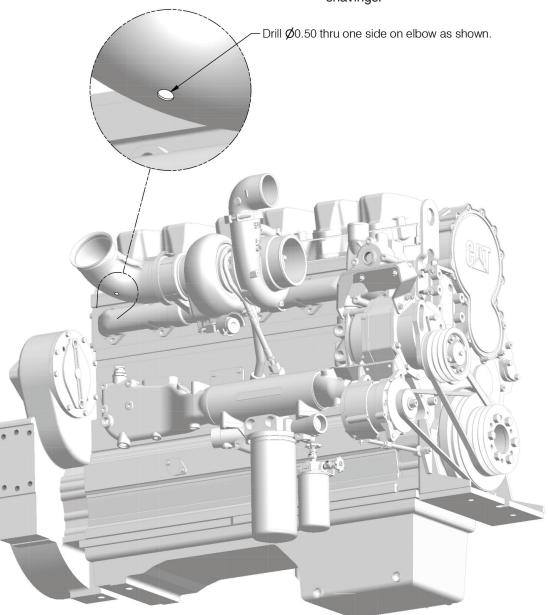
Drill hole as shown. Note: Tier III CAT engine shown...your installation may vary.
